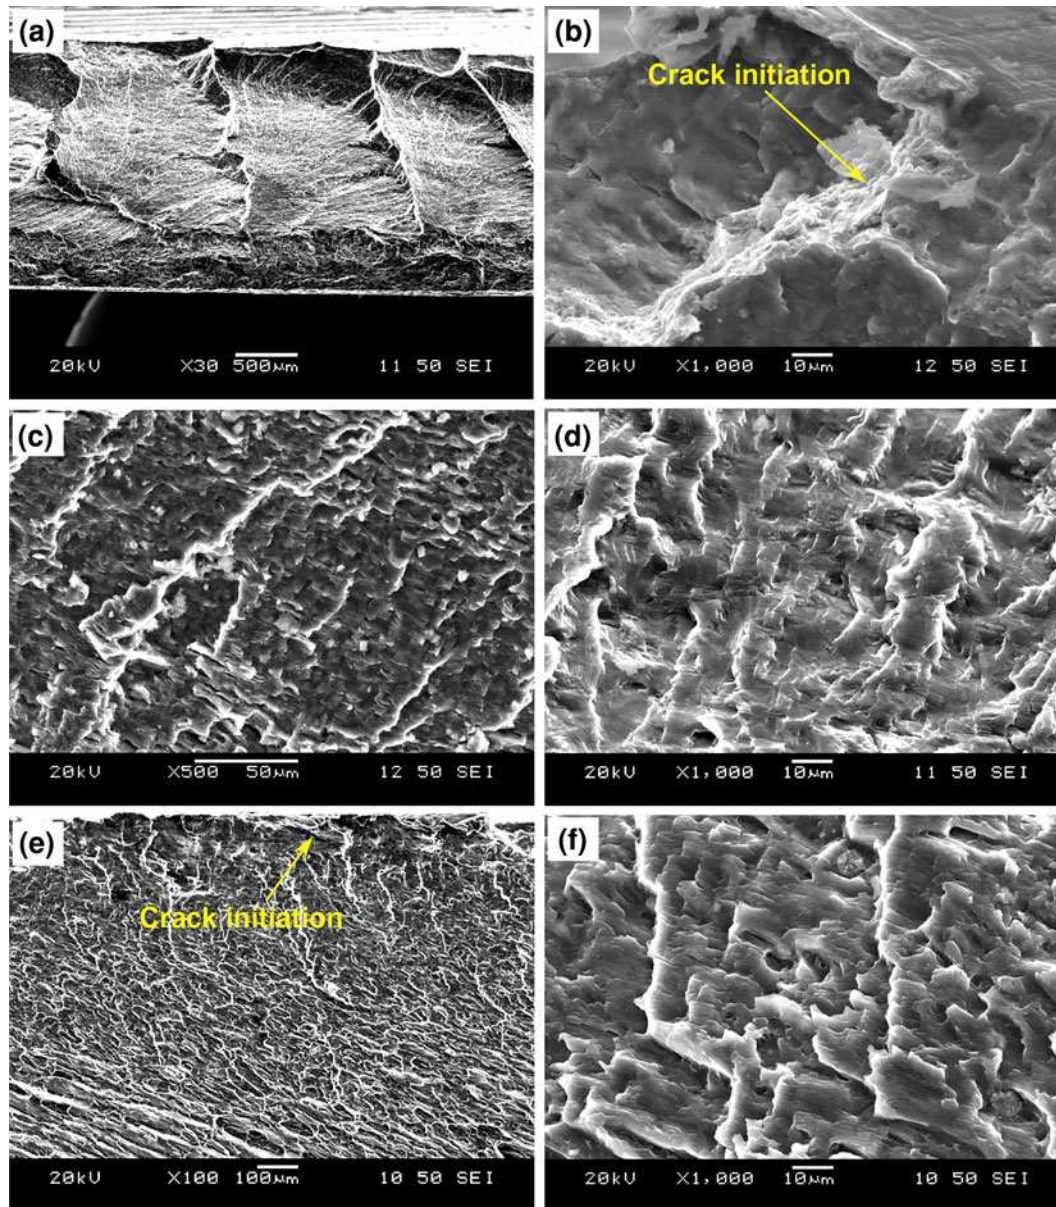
Typical SEM images of the fatigue fracture surface of a FSLWed AZ31B-H24 Mg alloy assembled at a rotational rate of 1000 rpm and a welding speed of 20 mm/s: (a) fatigue fracture surface at a lower  $P_{\max} = 1$  kN, (b) crack initiation site at a lower  $P_{\max} = 1$  kN, (c) crack propagation region at a lower  $P_{\max} = 1$  kN, (d) fatigue striations at a higher magnification at a lower  $P_{\max} = 1$  kN, (e) fatigue fracture surface and crack initiation site at a higher  $P_{\max} = 5$  kN, and (f) crack propagation region at a higher  $P_{\max} = 5$  kN.
